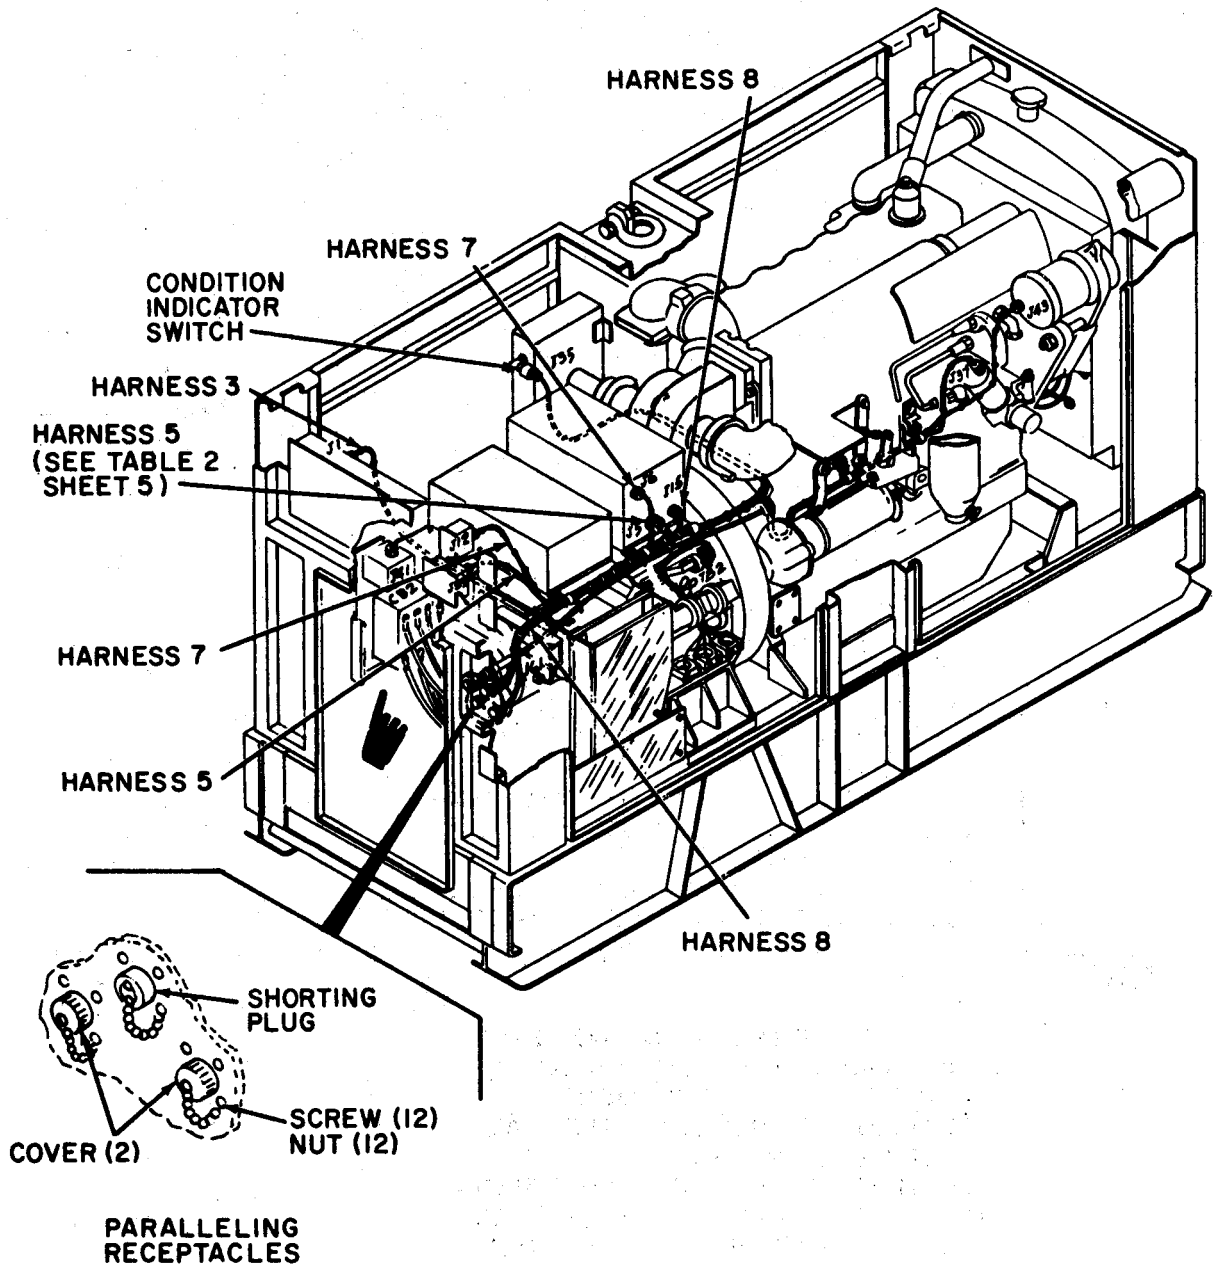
Wiring harnesses 400 hertz generator sets, removal and installation (sheet 3 of 5)
